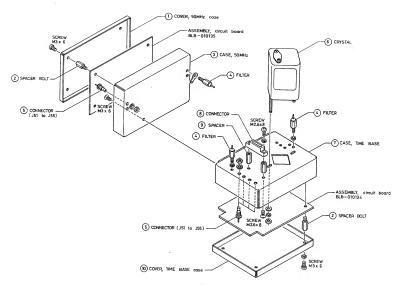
TR4172 MECHANICAL PARTS STANDARD FREQUENCY BLOCK MEP-342 ASSEMBLY
